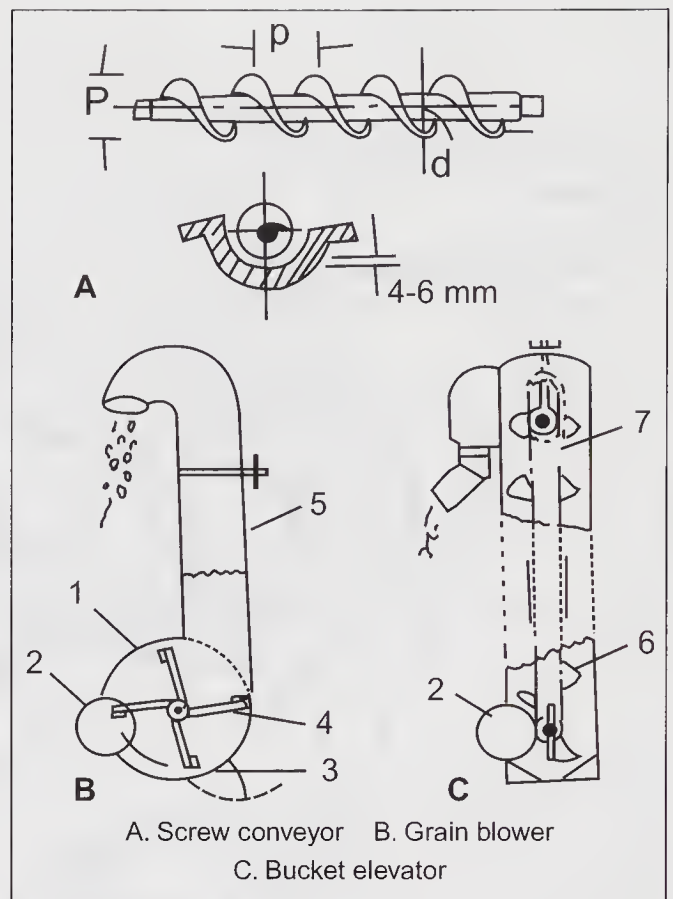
(A-C) Grain conveying devices. 1, Case; 2, Inlet; 3, Checking port; 4, Blade; 5, Flow pipe; 6, Bucket; 7, Belt.
